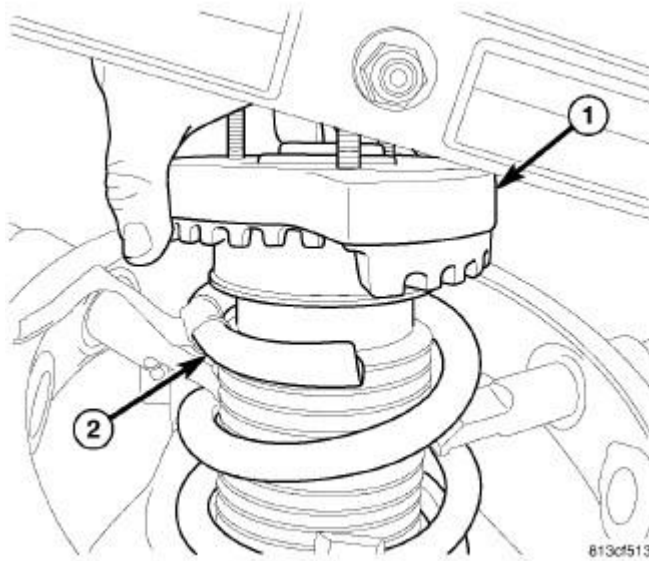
UPPER MOUNT REMOVAL/INSTALLATION
